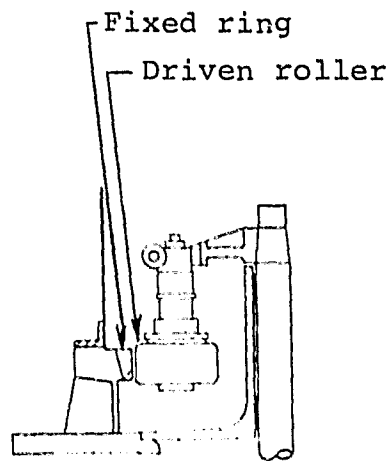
Roller mill with stationary ring and driven roller (ref. 3-5).
